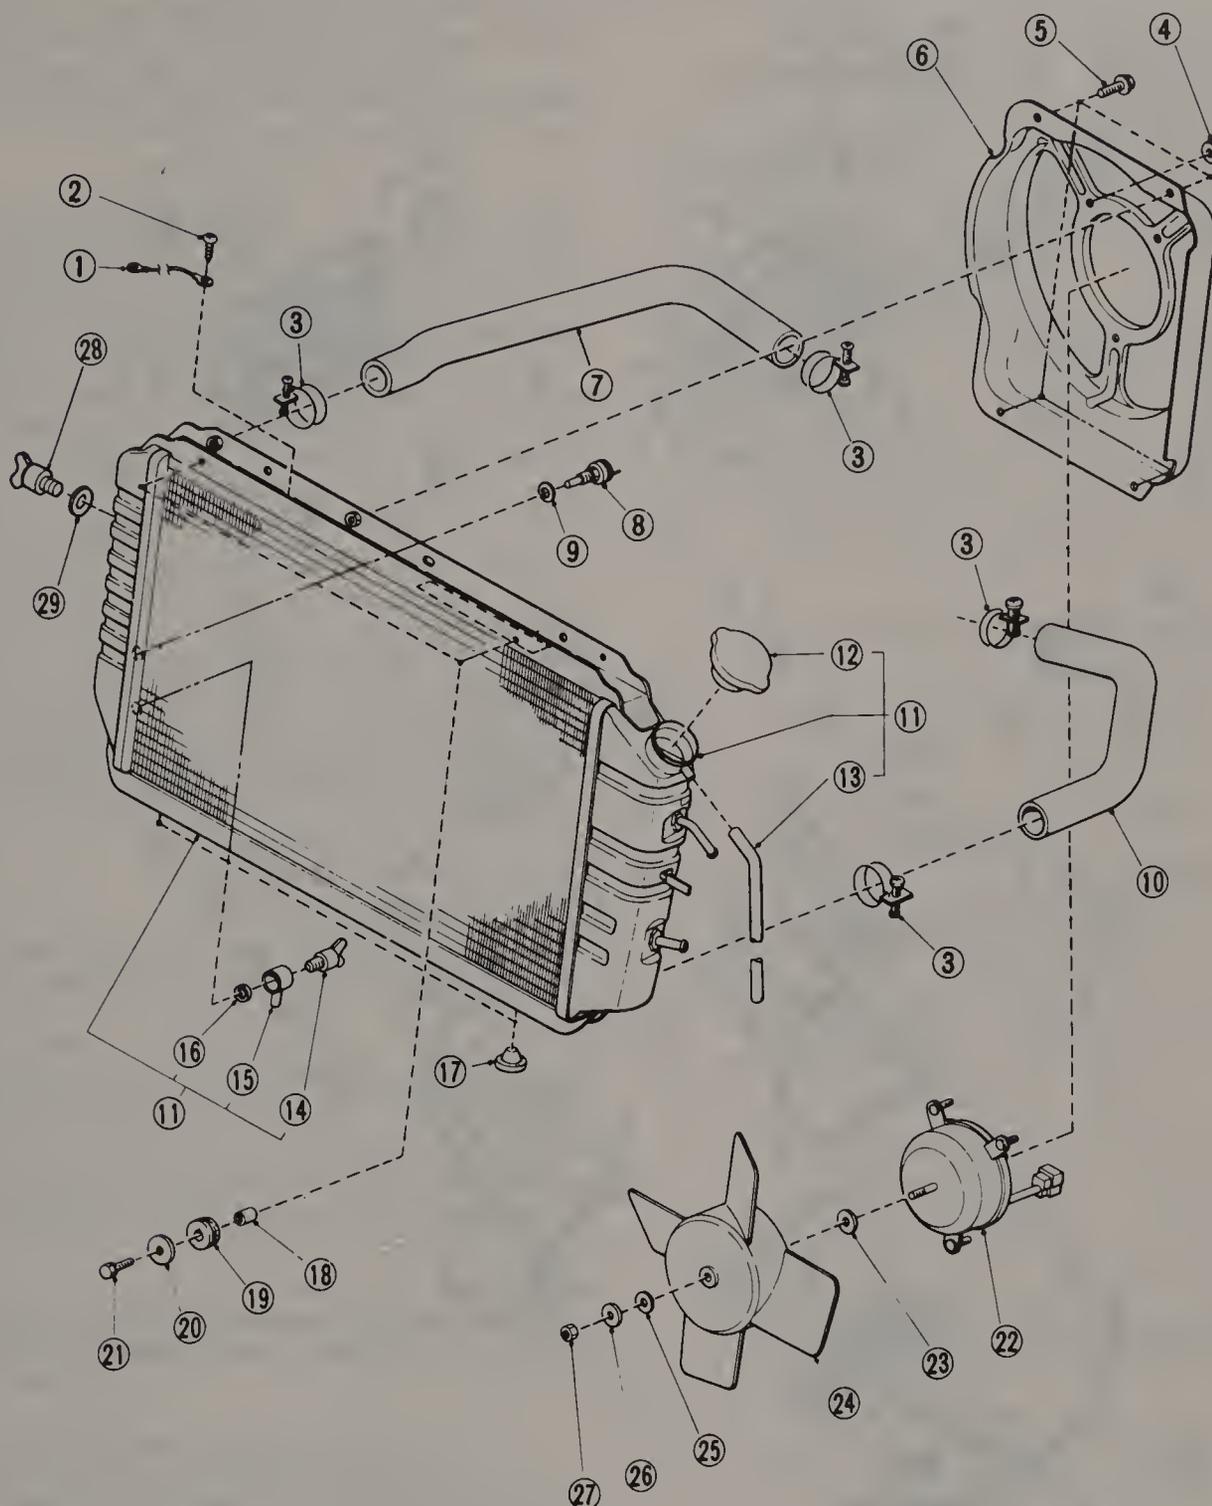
Fan/motor and radiator components – exploded view (Sec 3)
